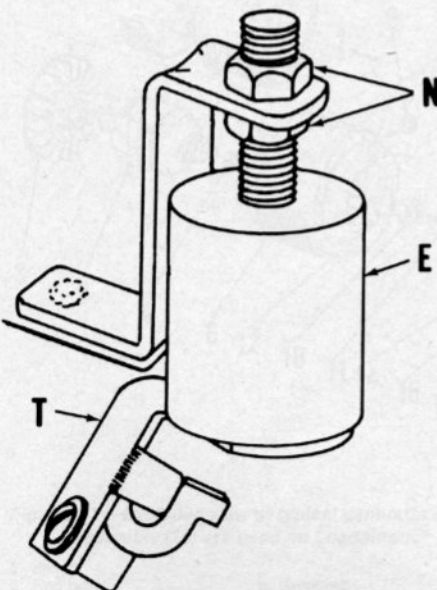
Loadmatic® Automatic Idle Control* is adjusted by turning nuts (N) until bottom of electromagnet (E) is parallel with throttle arm (T). Do not bend throttle arm or electromagnet bracket.
